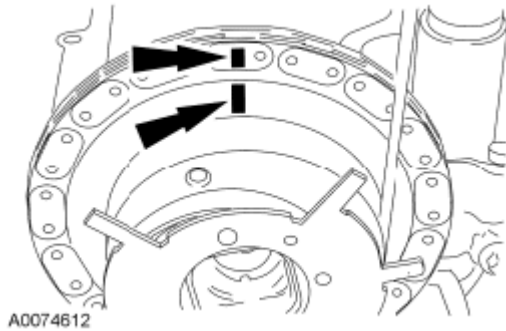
Locating Mark On Timing Chain And Camshaft Phaser And Sprocket Assembly
